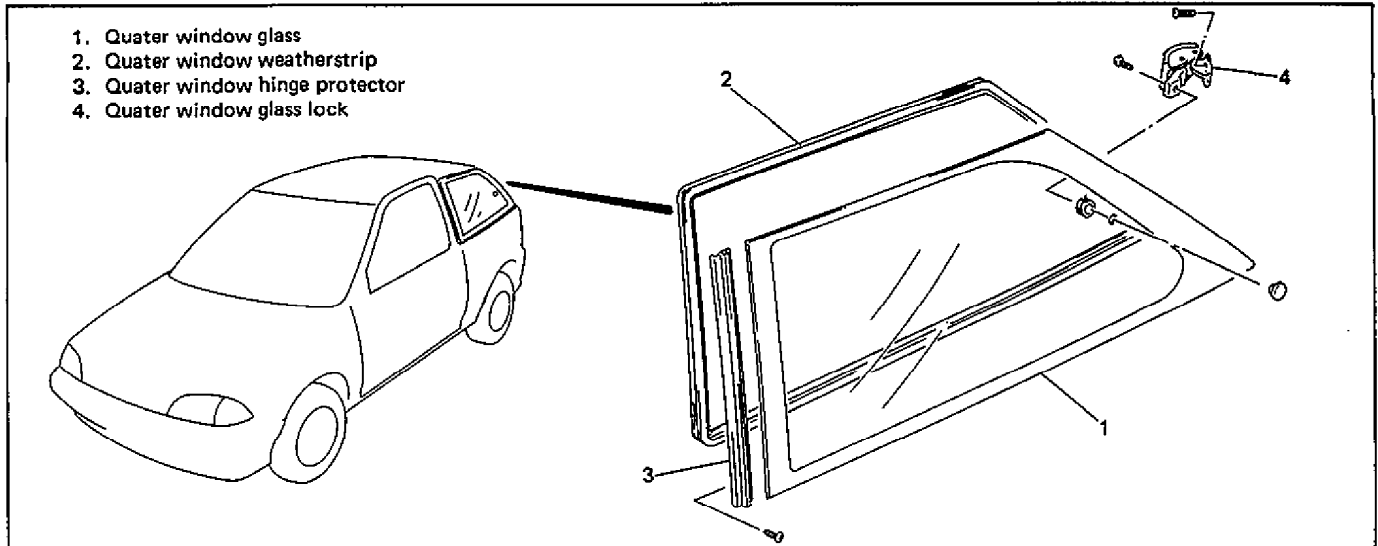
Quarter Vent Window Assembly (for 3 door model)
